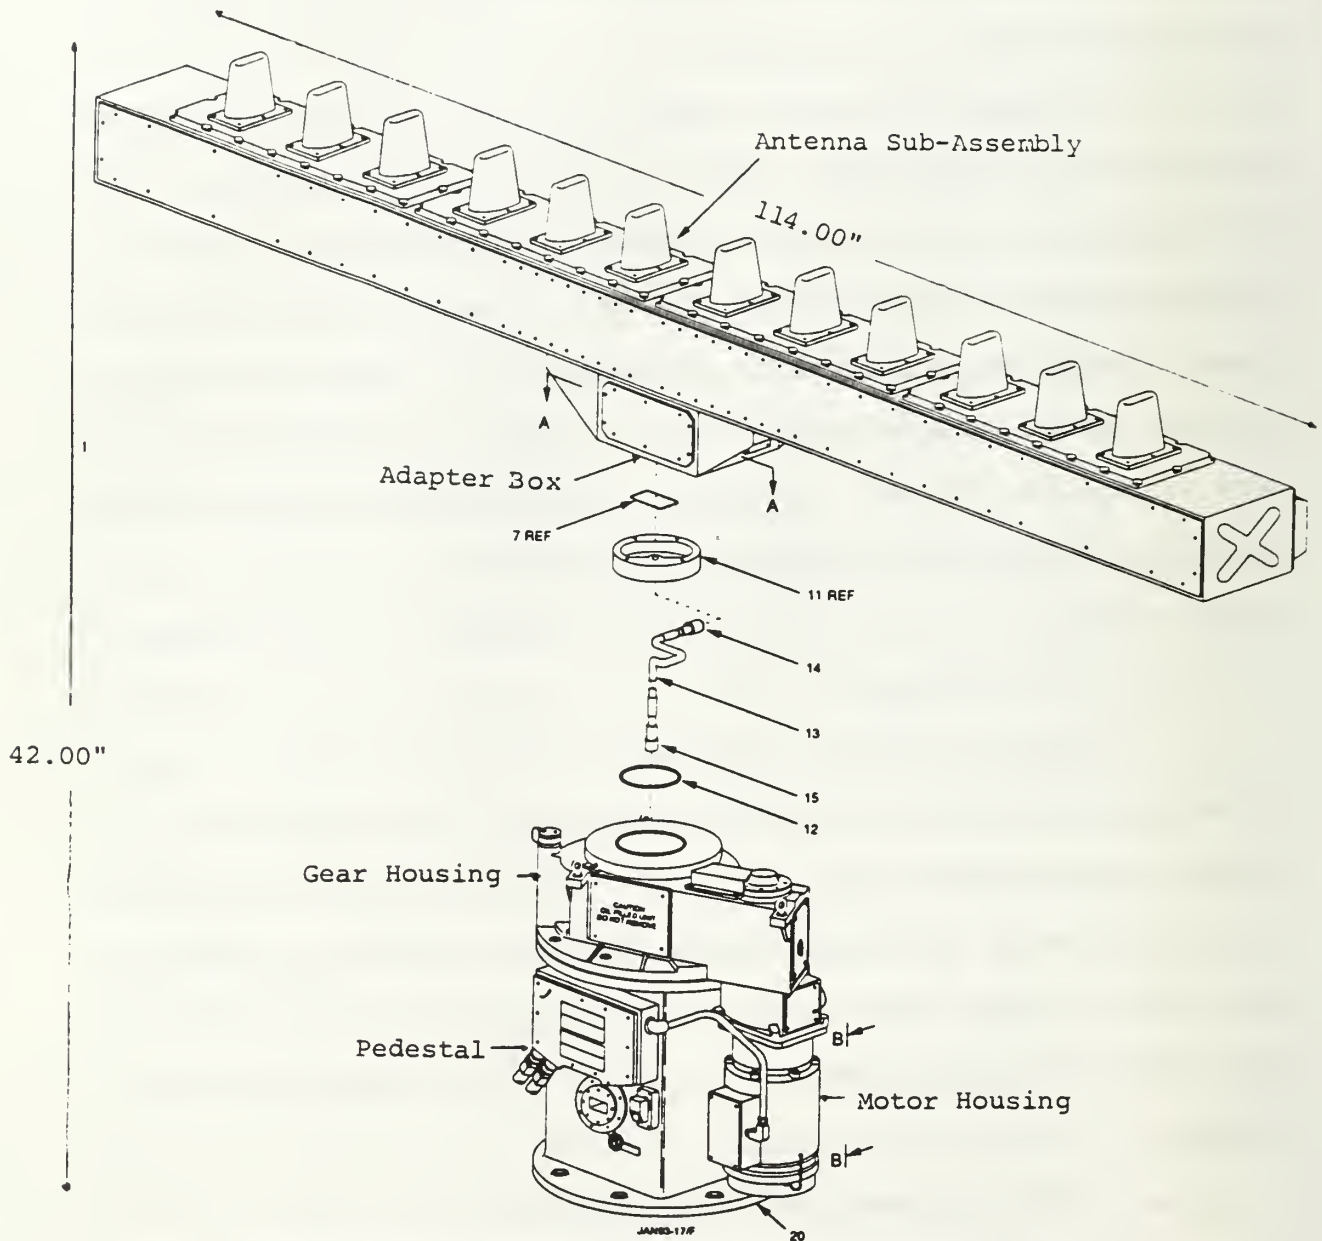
AN/SPS-67(V)3 ASSEMBLY DRAWING. COURTESY NORDEN SYSTEMS, INC.
